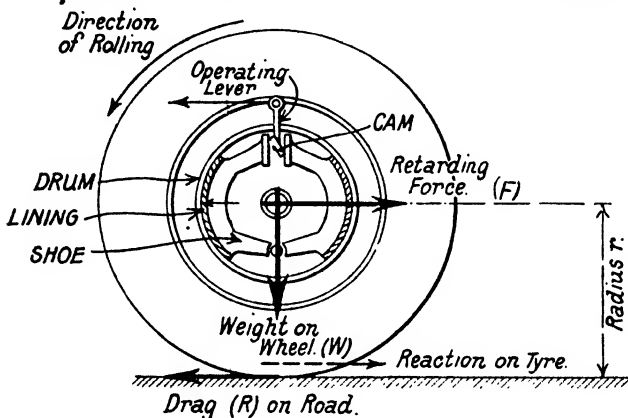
DIAGRAMMATIC VIEW OF A BRAKED WHEEL, SHOWING THE PRINCIPAL FORCES WHICH ARE ACTING UPON WHEEL, AXLE AND ROAD
